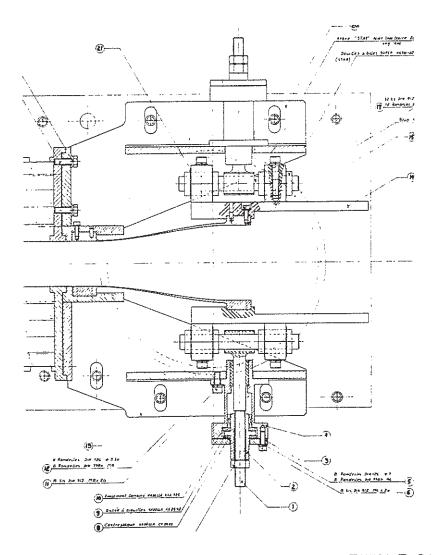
DESIGN OF VKI SINGLE JACK FLEXIBLE CALIBRATION NOZZLE.
